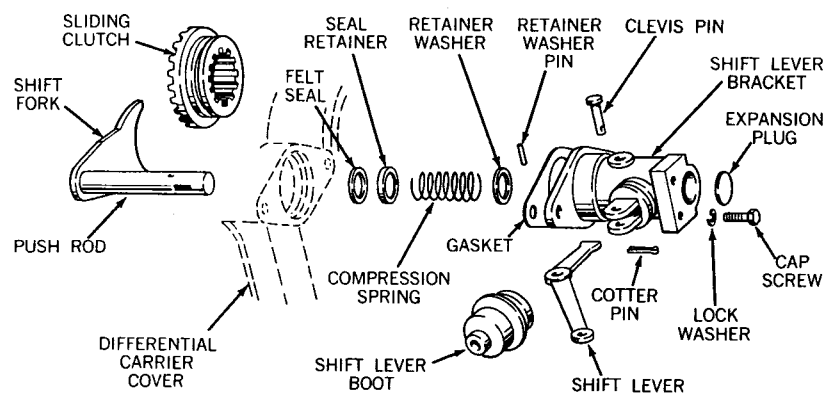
Exploded View of Vacuum-Operated Lockout Mechanism
